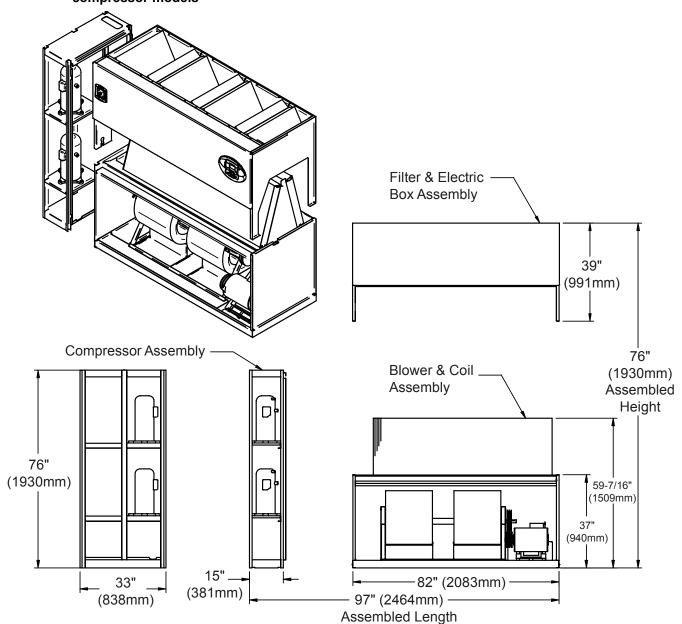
Component dimensions—downflow air-cooled, 53-77kW (15-22 ton), scroll/digital scroll compressor models
